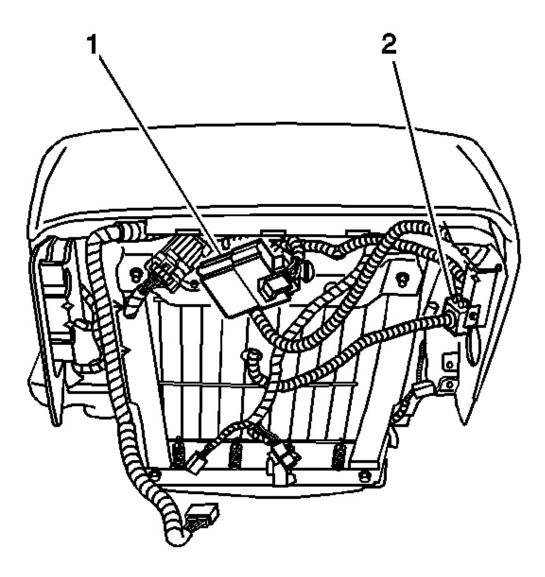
View Of Electronic Control Unit & Pressure Switch Courtesy of GENERAL MOTORS CORP.
